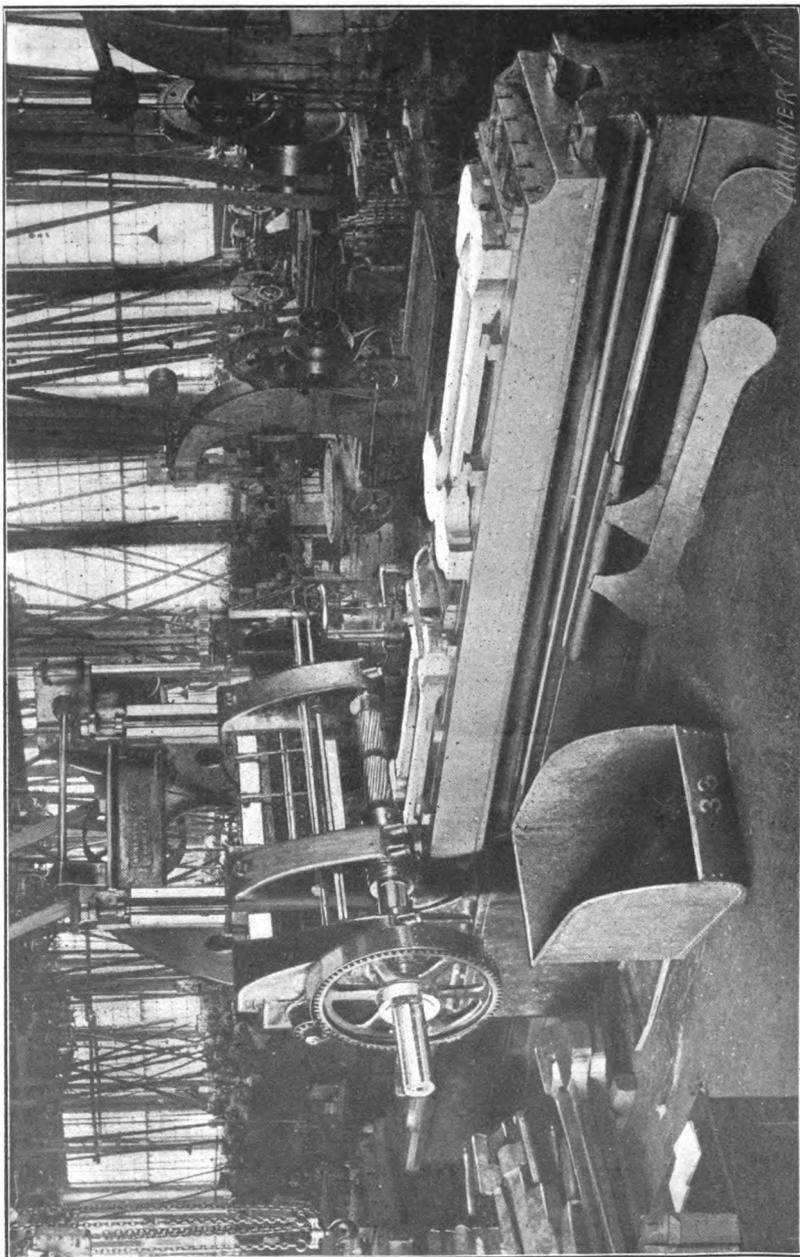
Finishing the Sides of the End Rods in a Slab Milling Machine
